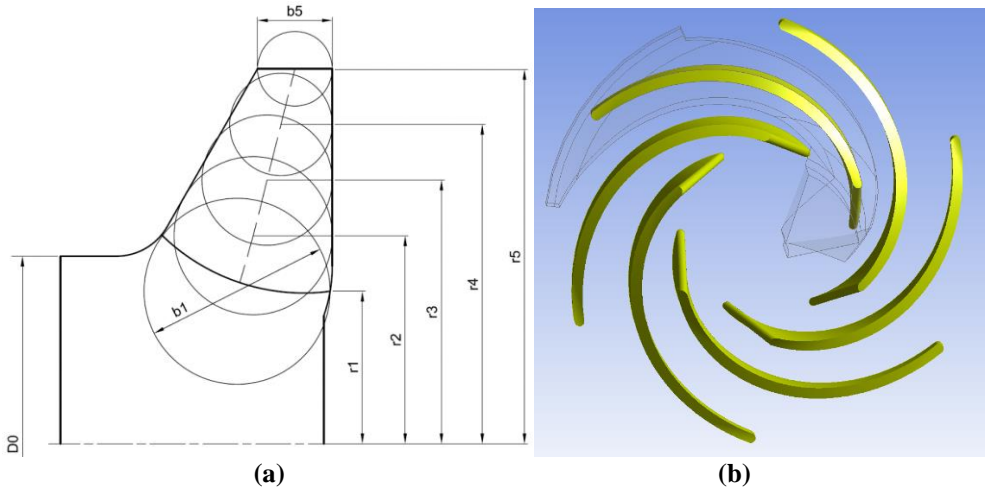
(a) Meridian section modelling of the pump impeller. (b) Pump impeller blade geometry (model CH 6,3/20 1,1-2) obtained in ANSYS DM
